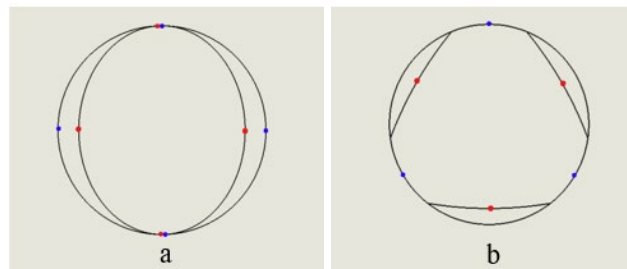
Measurement point of profile dimension (a) P2; (b) PC3
